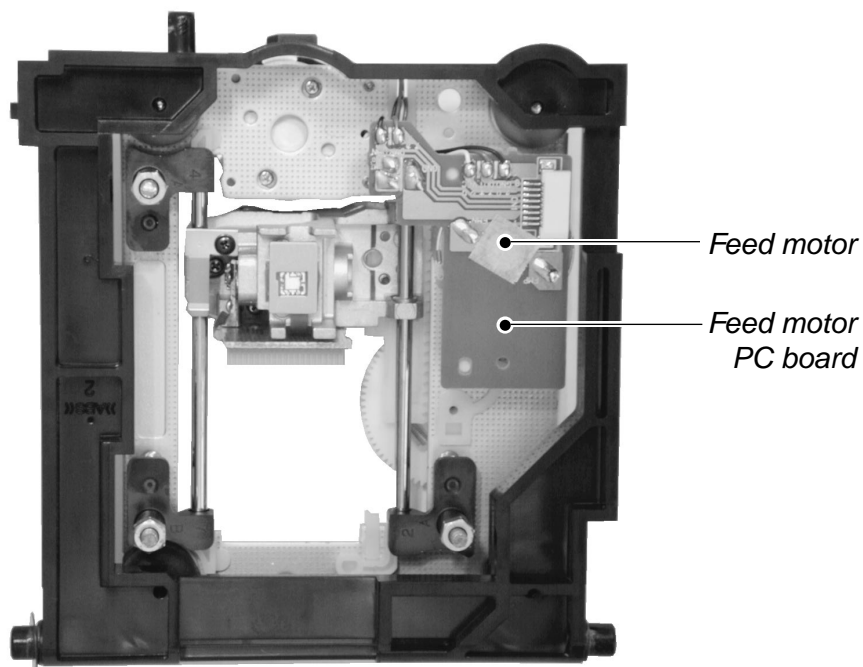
Pickup mechanism chassis assembly (Bottom side)
